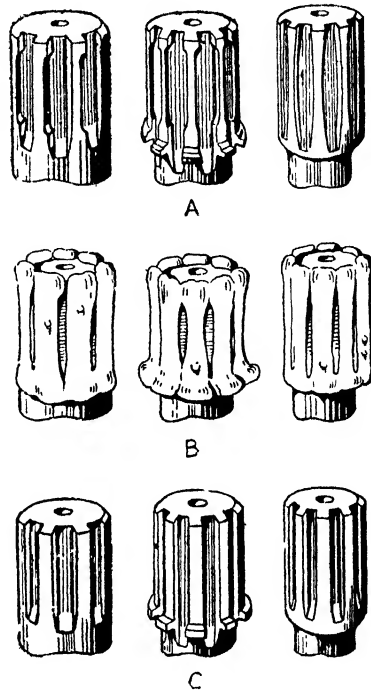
Castellated Shafts built up by Electrodeposition with nickel. A.—Worn Shafts. B.—As Nickel Deposited. C.—After Final Machining.
